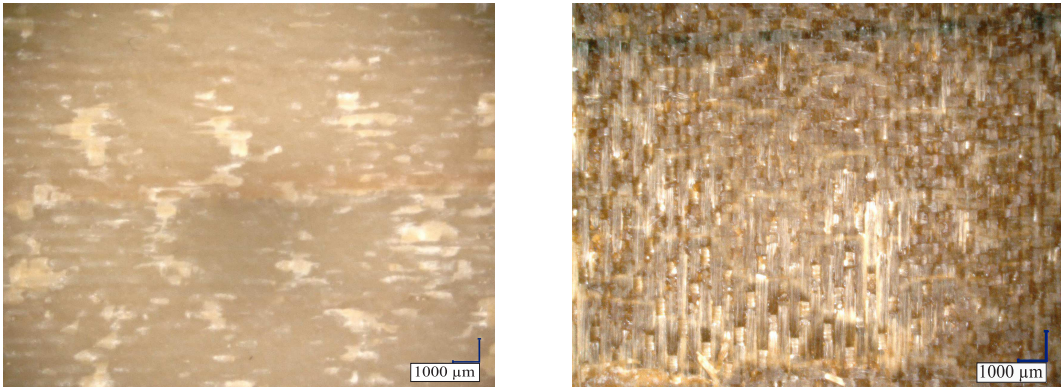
Fracture surfaces of unaged (left) and aged (right) sandwich T-joints.
